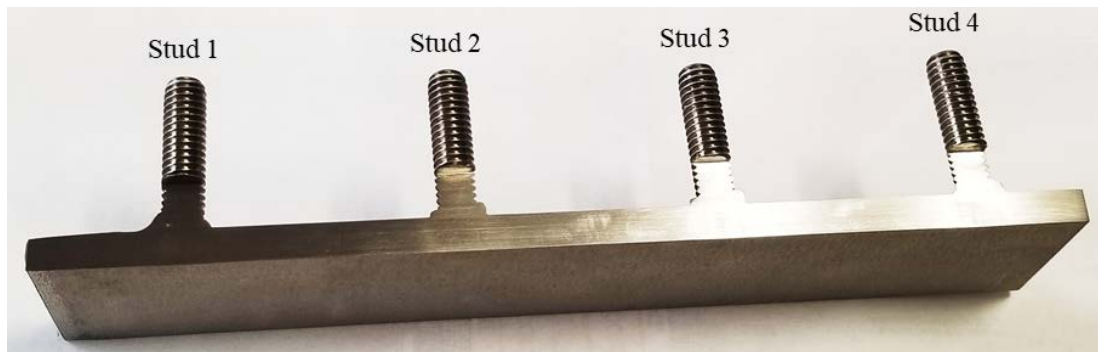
Stud weld test specimen with four sectioned studs.
